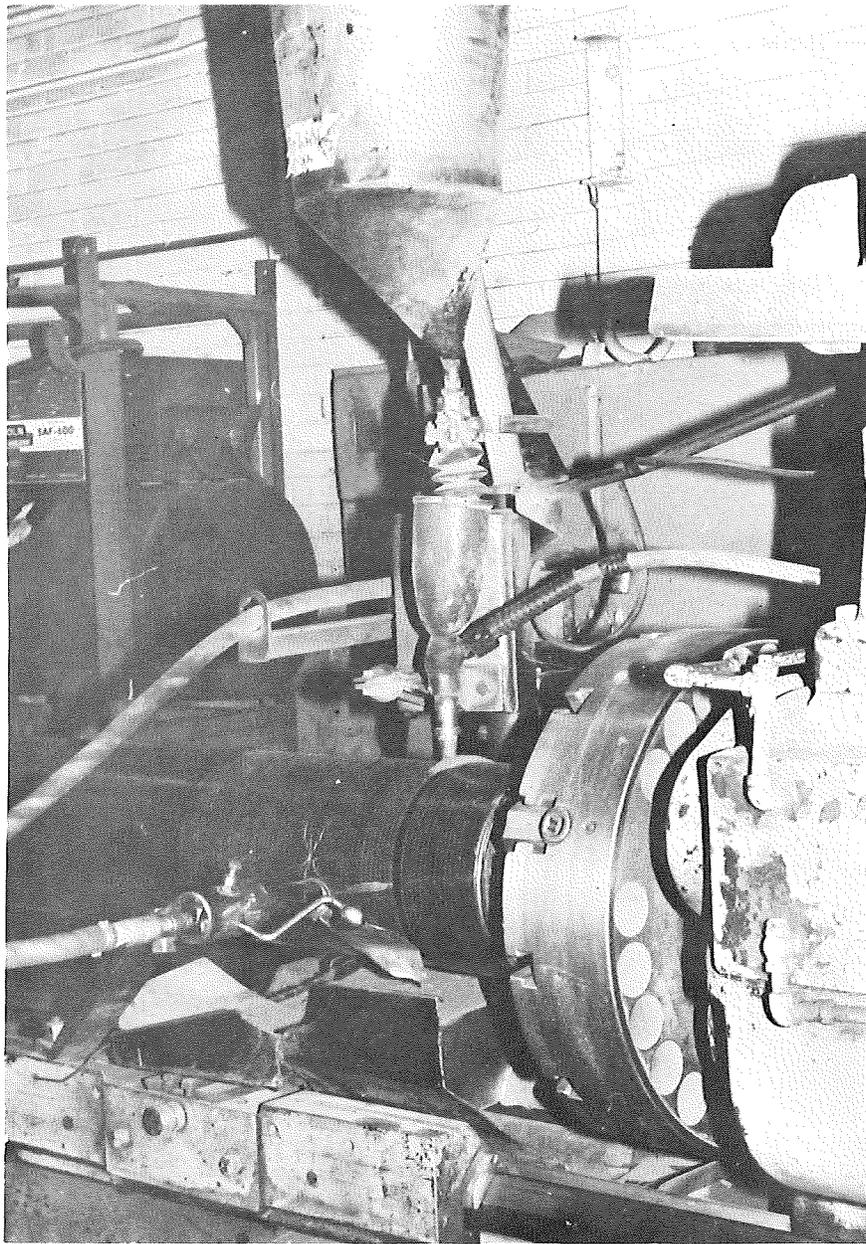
Weld repairing worn shaft by submerged arc welding surfacing process. Notice the fixturing that is required to properly use an automatic welding process.
